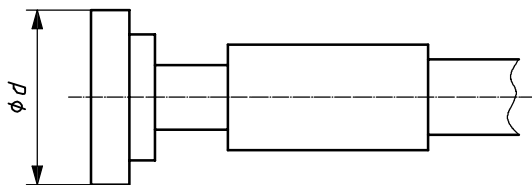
Forms R and S — Straight hose fitting with flange head with O-ring groove in accordance with ISO 12151-3
